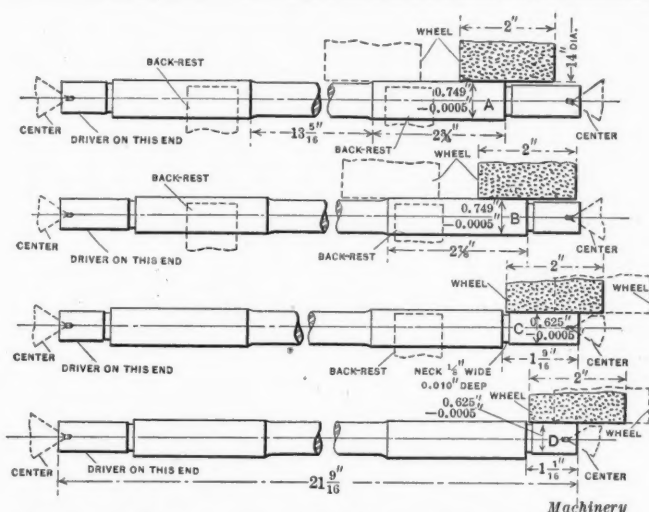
Methods of grinding Reversing Shaft for a Milling Machine by "Fixed-wheel" Practice of applying Wheel to Work
